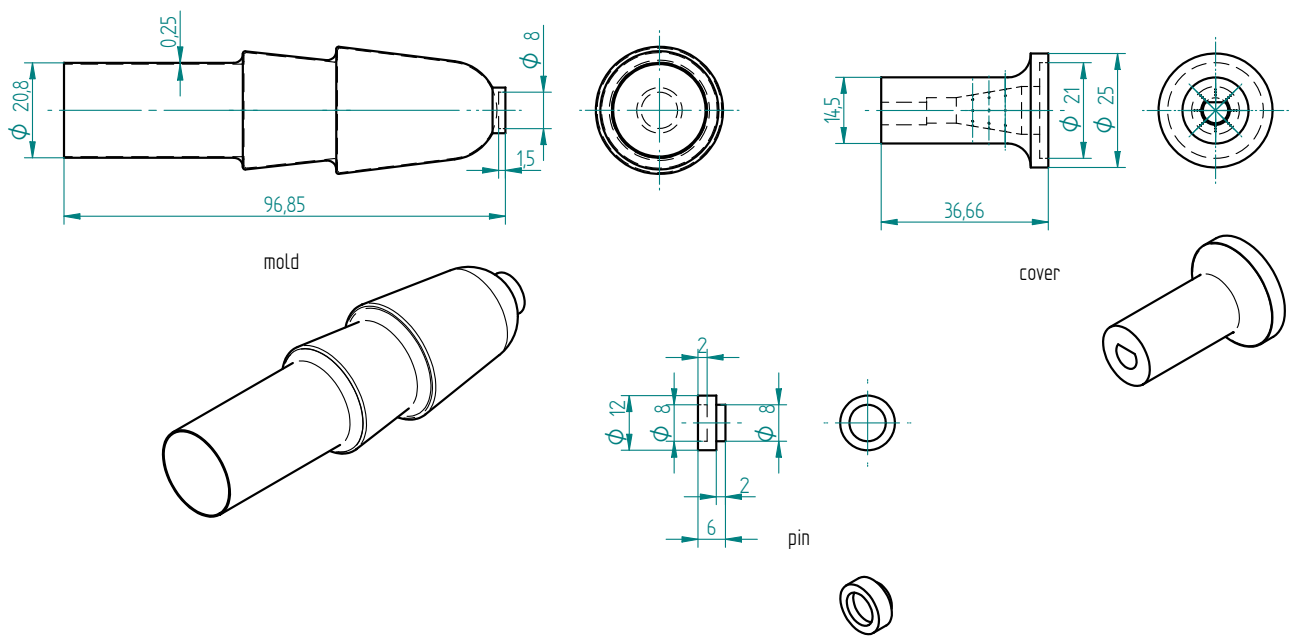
Drawing of the vac u lock adapter moldator parts (2)
